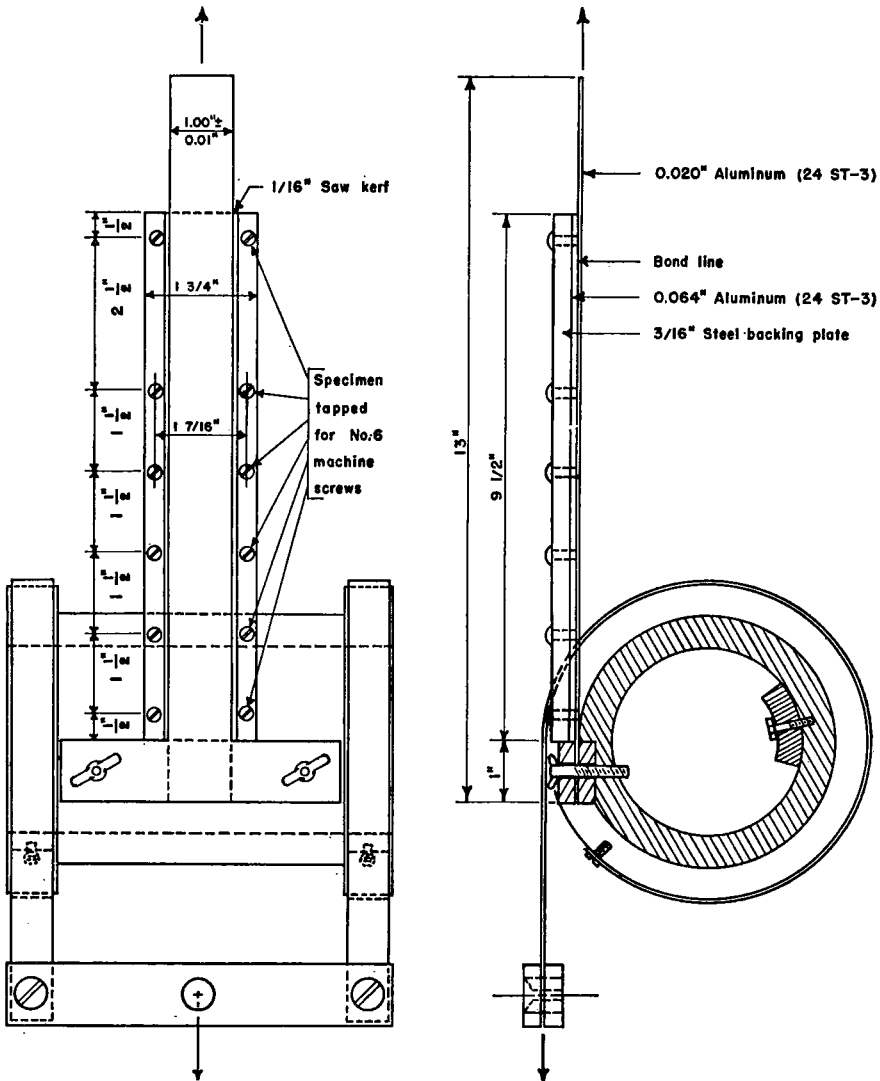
Apparatus and specimen suitable for making peel test of laminated metal bonds.
